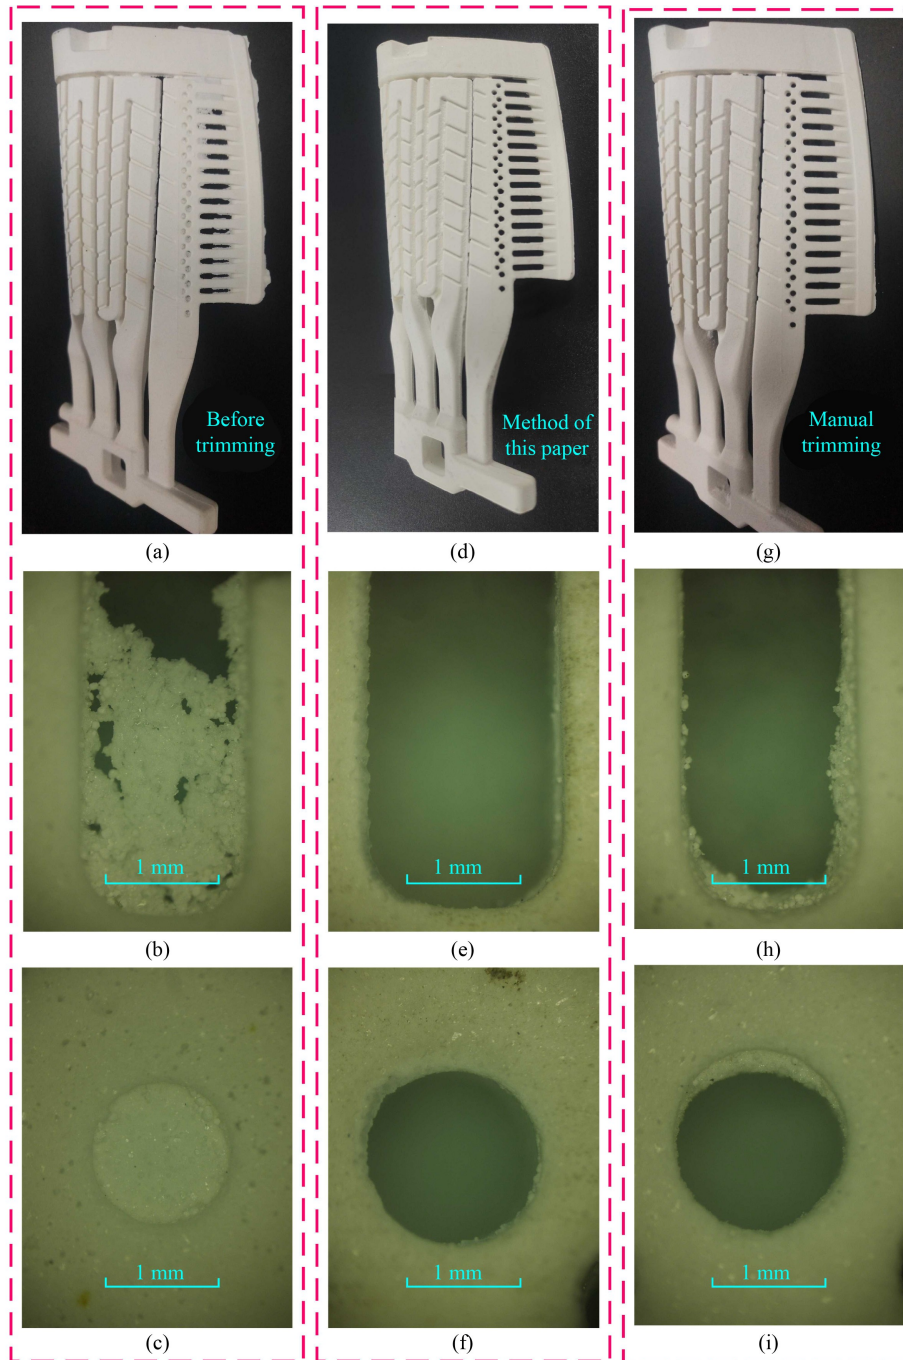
Trimming results of the ceramic core: (a) ceramic core before trimming, (b) burr and hole blockage of long groove, (c) burr and hole blockage of hole, (d) ceramic core after laser trimming, (e) long groove after laser trimming, (f) hole after laser trimming, (g) ceramic core after manual trimming, (h) long groove after manual trimming, and (i) hole after manual trimming.
